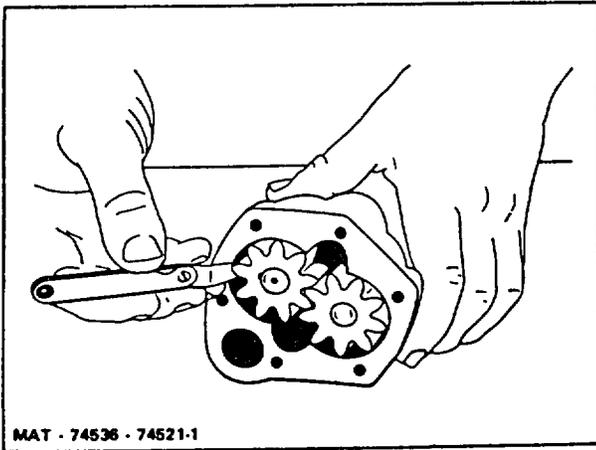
Checking Oil Pump Gear Clearance in Pump Body
